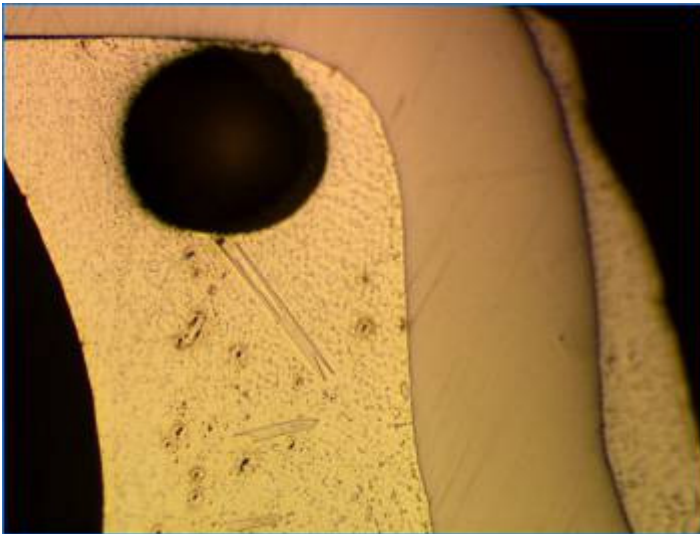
cross section, SN66, U62, right lead solder crack and void, 200xc
